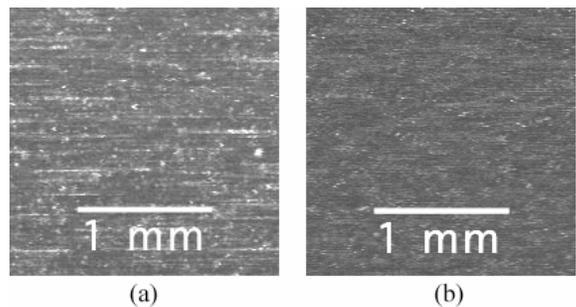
Detailed laser-scatter images in contact surface of SN235P valve 8 after (a) initial rough machining and (b) finish machining.
